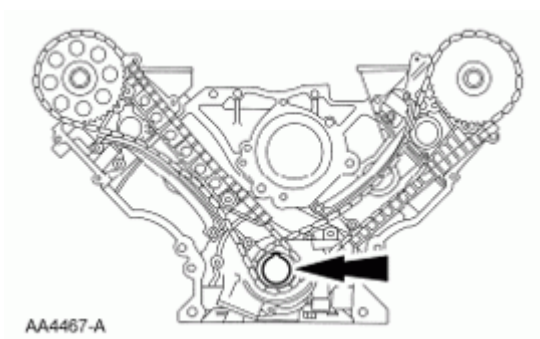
Locating Crankshaft Keyway At 12 O'Clock Position
